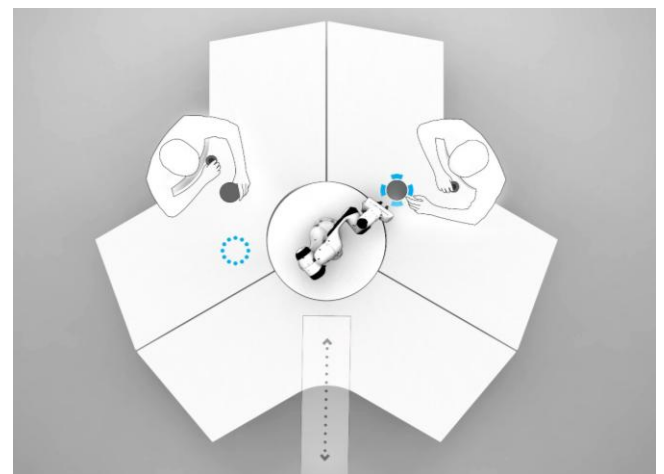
The concept of the prototype of an assisting workplace for HRC. It includes an integrated Franka Emika robot handling tools and work-pieces which have been delivered by a conveyor belt
